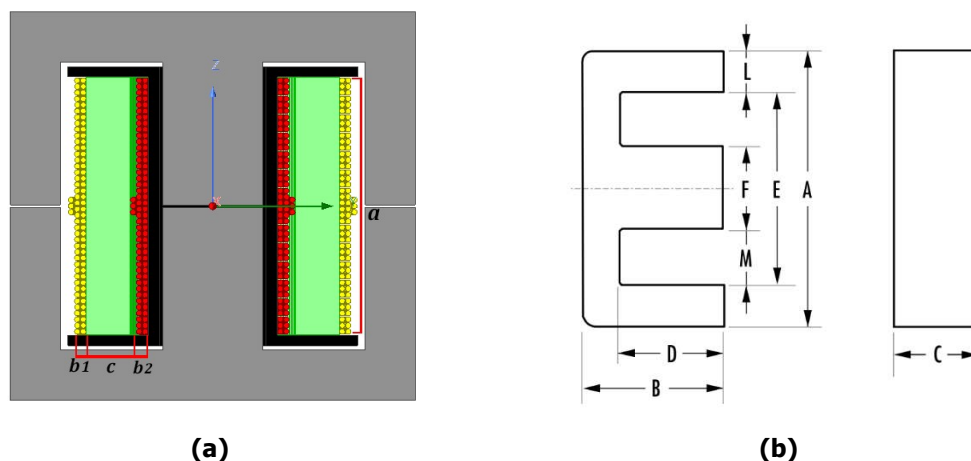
Dimensional Notation Used. (a) Width and Height Winding Build, (b) Core Dimensions
